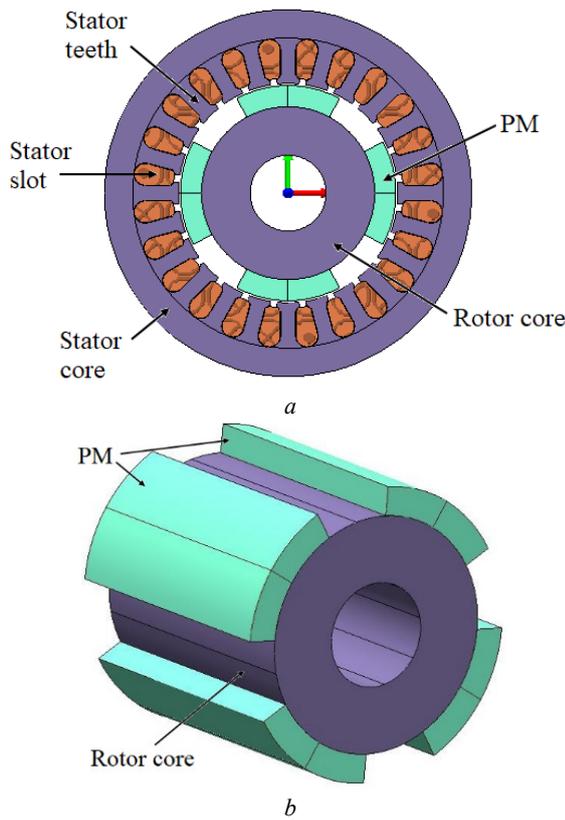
Reference radial flux PMBLDC motor: a – cross sectional view; b – 3-D view of rotor
